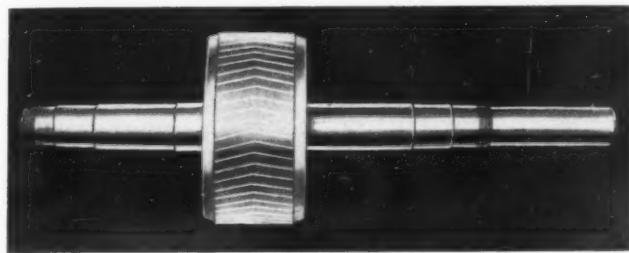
Herringbone design of rotor eliminates noise and endthrust in squirrel cage induction motors
